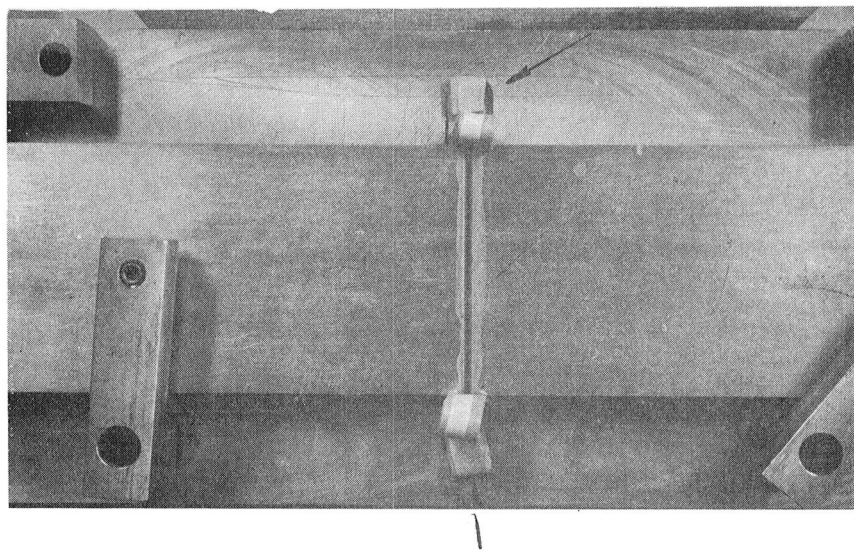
ALUMINUM BUTT JOINT SHOWING ADHESIVE DAM.
